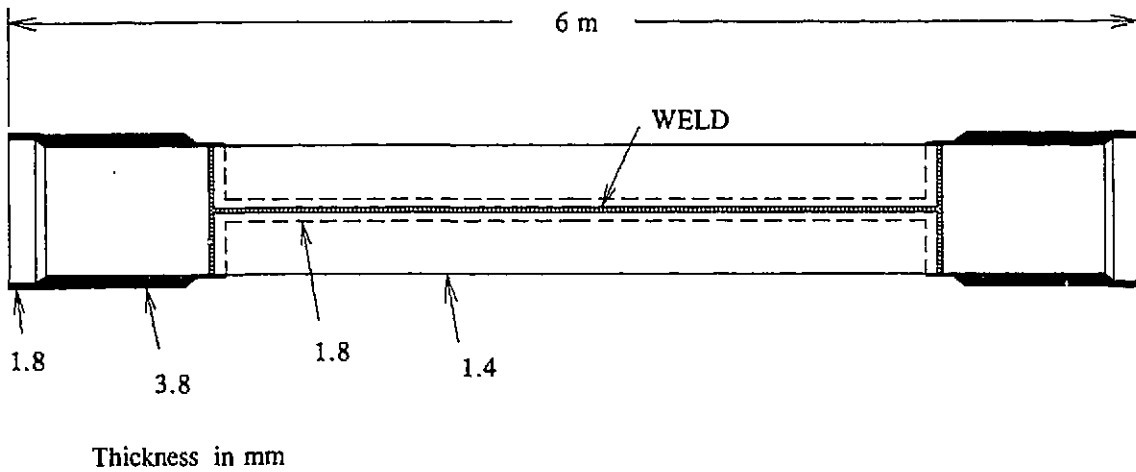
Schematic diagram of a seam-welded calandria tube with thick ends and a thick weld region.
